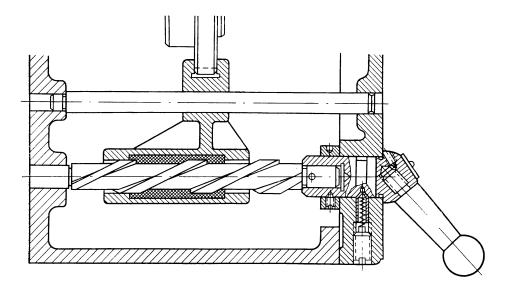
Components controlling a sliding cluster gear in the feed gearbox of a planer
